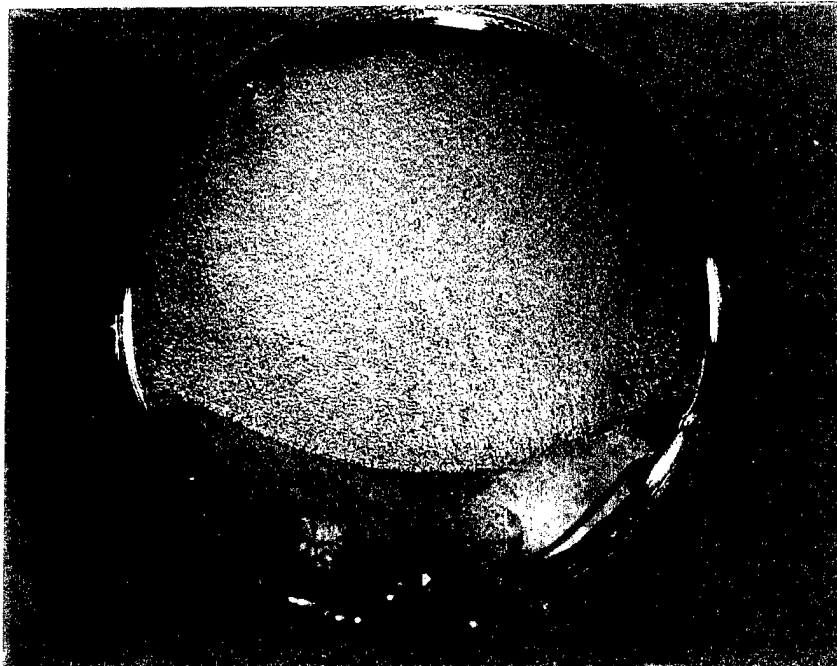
Fracture Surface of PUR Rod -174 in the As-Received Condition. Note the Increased Fatigue Zone as Opposed to the Fracture Surfaces of the SIK Rods (Mag. 2x).
